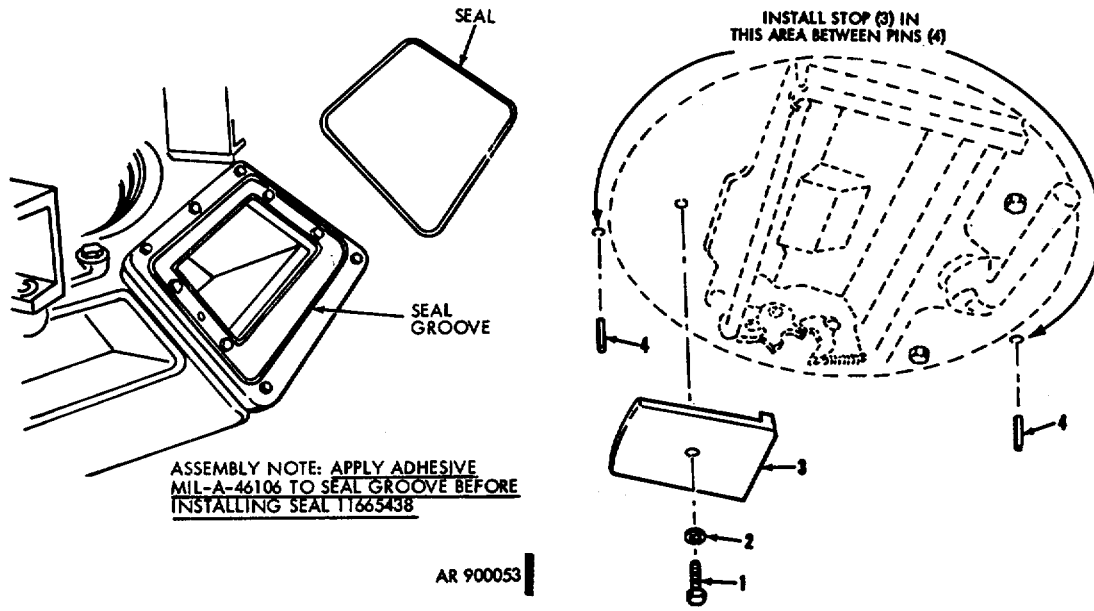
Removal/installation - cupola seal for transceiver (M551A1 only).
